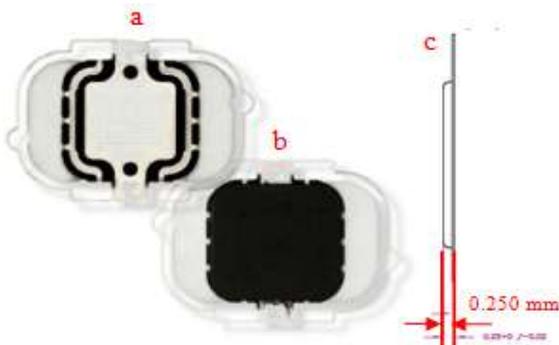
Secure micromodule card embedder (a-contact side, b-mold side, c-cross-section view)
